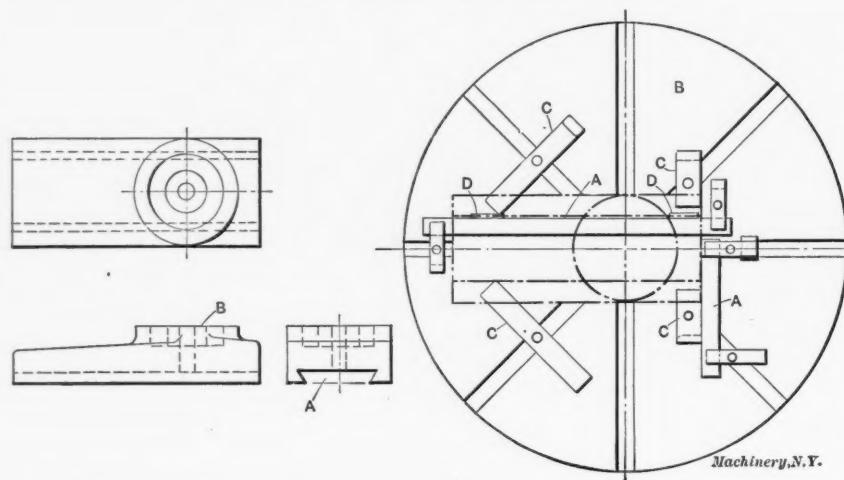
Fixture for Recessing Work shown in Fig. 182.
